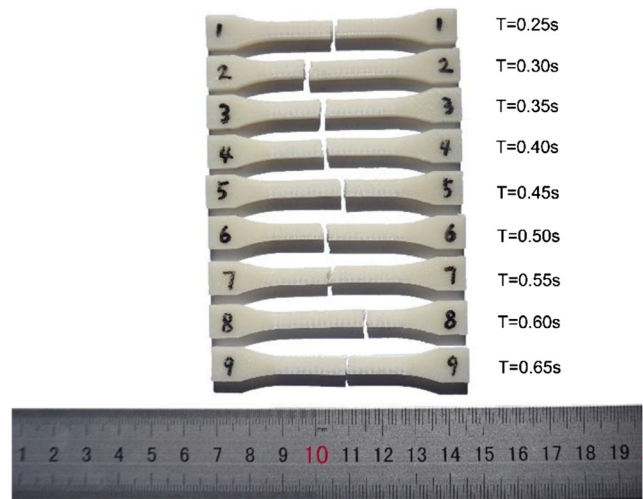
Tensile fracture of 3D printed samples under strengthening pressure of 3.5 kg/cm²
